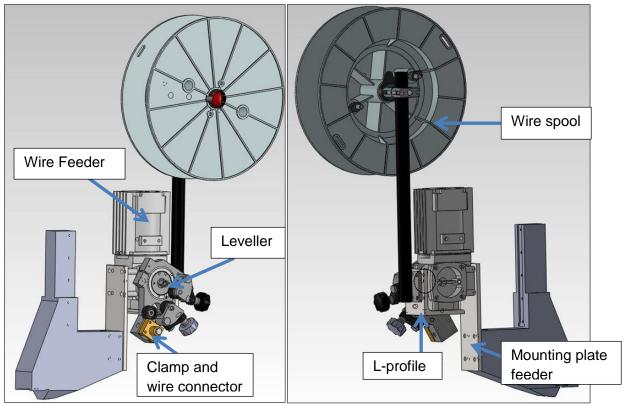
The pictures show the Wire Feeder and Leveller mounted on the arm
